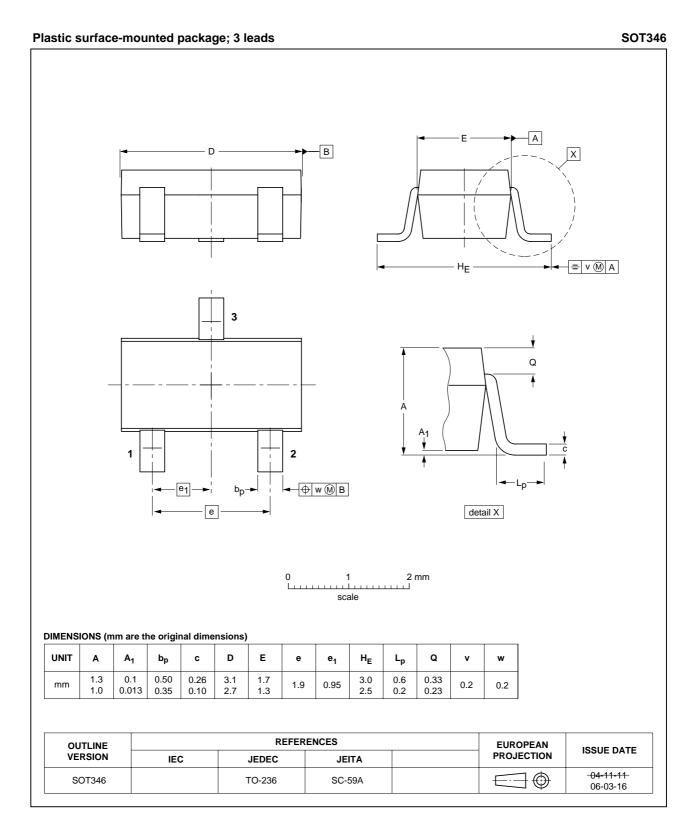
Package outline SOT346 (SC-59A/TO-236)
